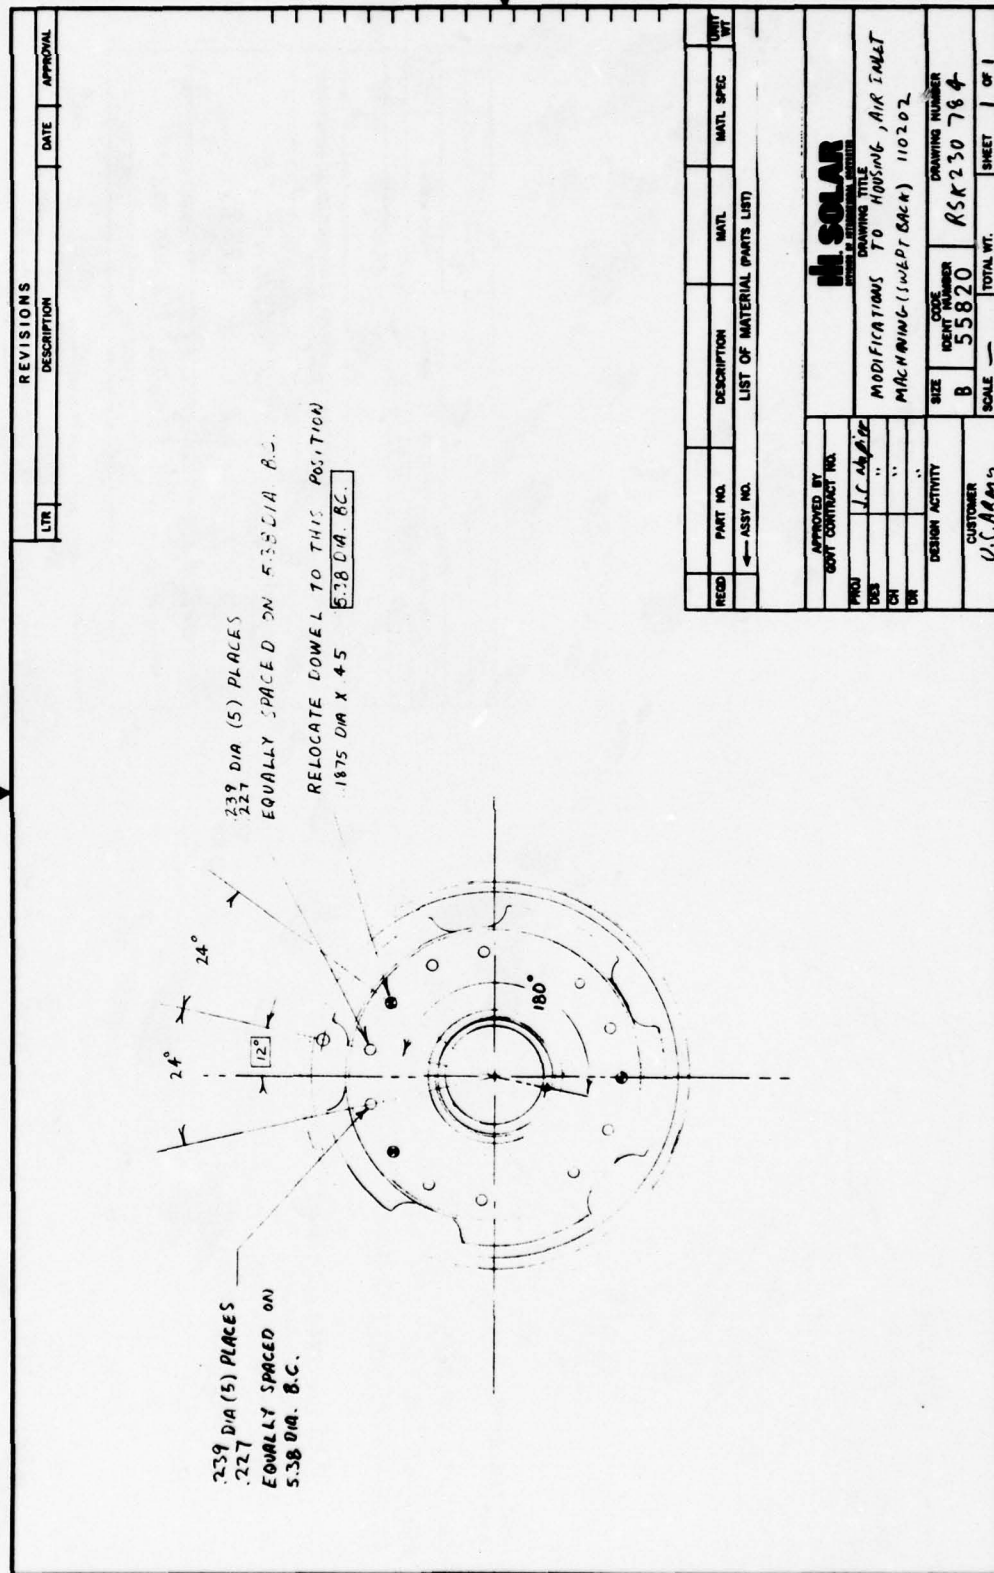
Modification of Air Inlet Housing (DSK 110202) for Ceramic Nozzle Design Concept #1 and #2
